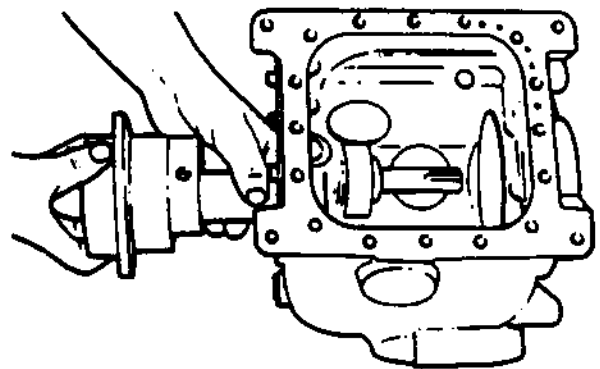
Removing or Replacing Crankshaft and Pump End Bearing Head
